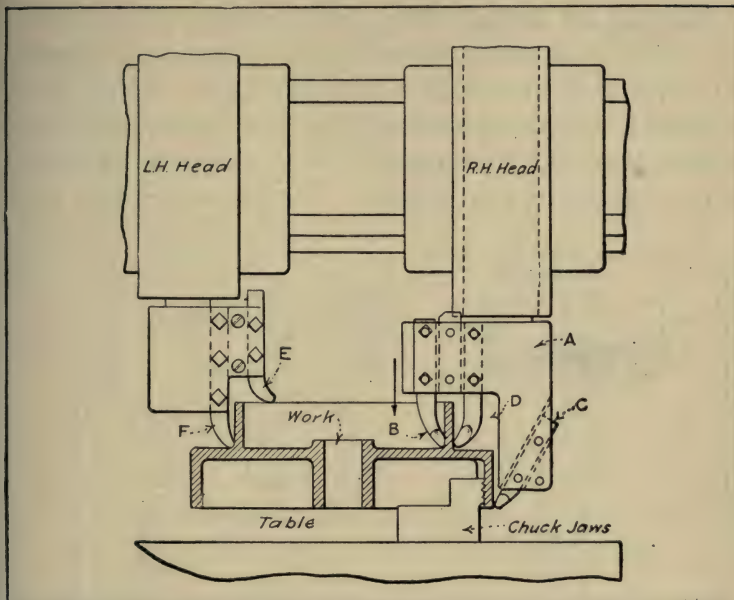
SPECIAL TURNING TOOLS ON A VERTICAL BORING MILL
